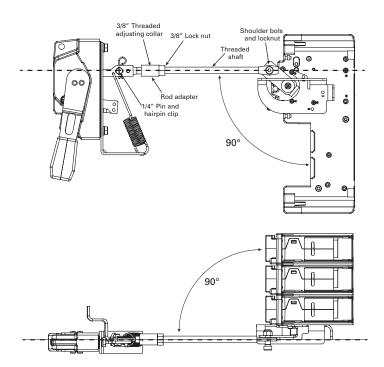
For proper alignment, position switch and operator assembly against panel back wall so that the threaded shaft is at right angles vertically and horizontally.
